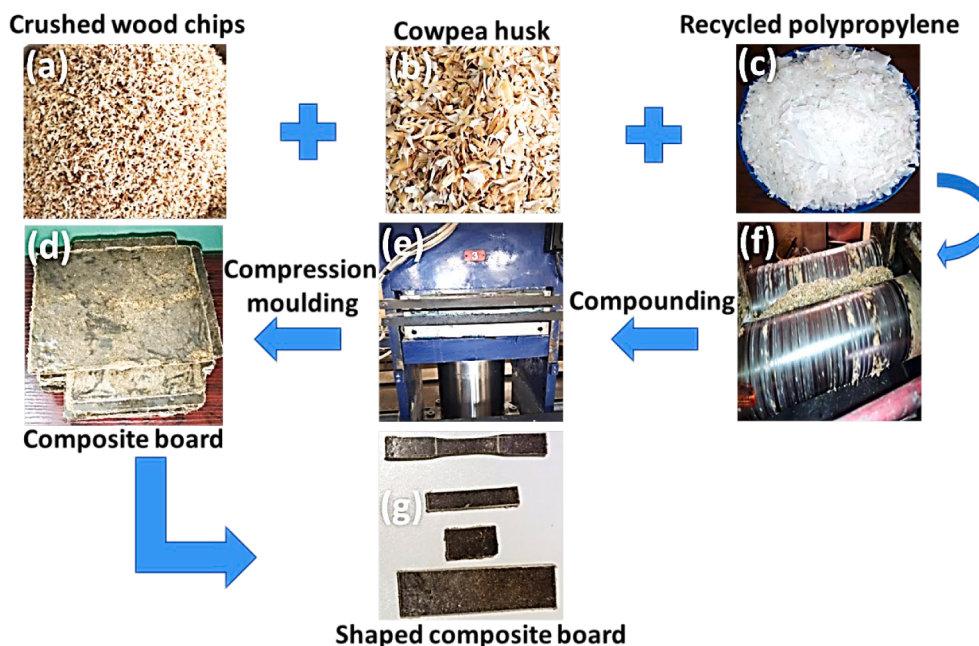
Process of composite production: (a) crushed wood chips; (b) cowpea husk; (c) recycled polypropylene; (d) compounding of composite in two-row mill; (e) compression moulding machine; (f) produced composite boards; (g) cut composite board.
